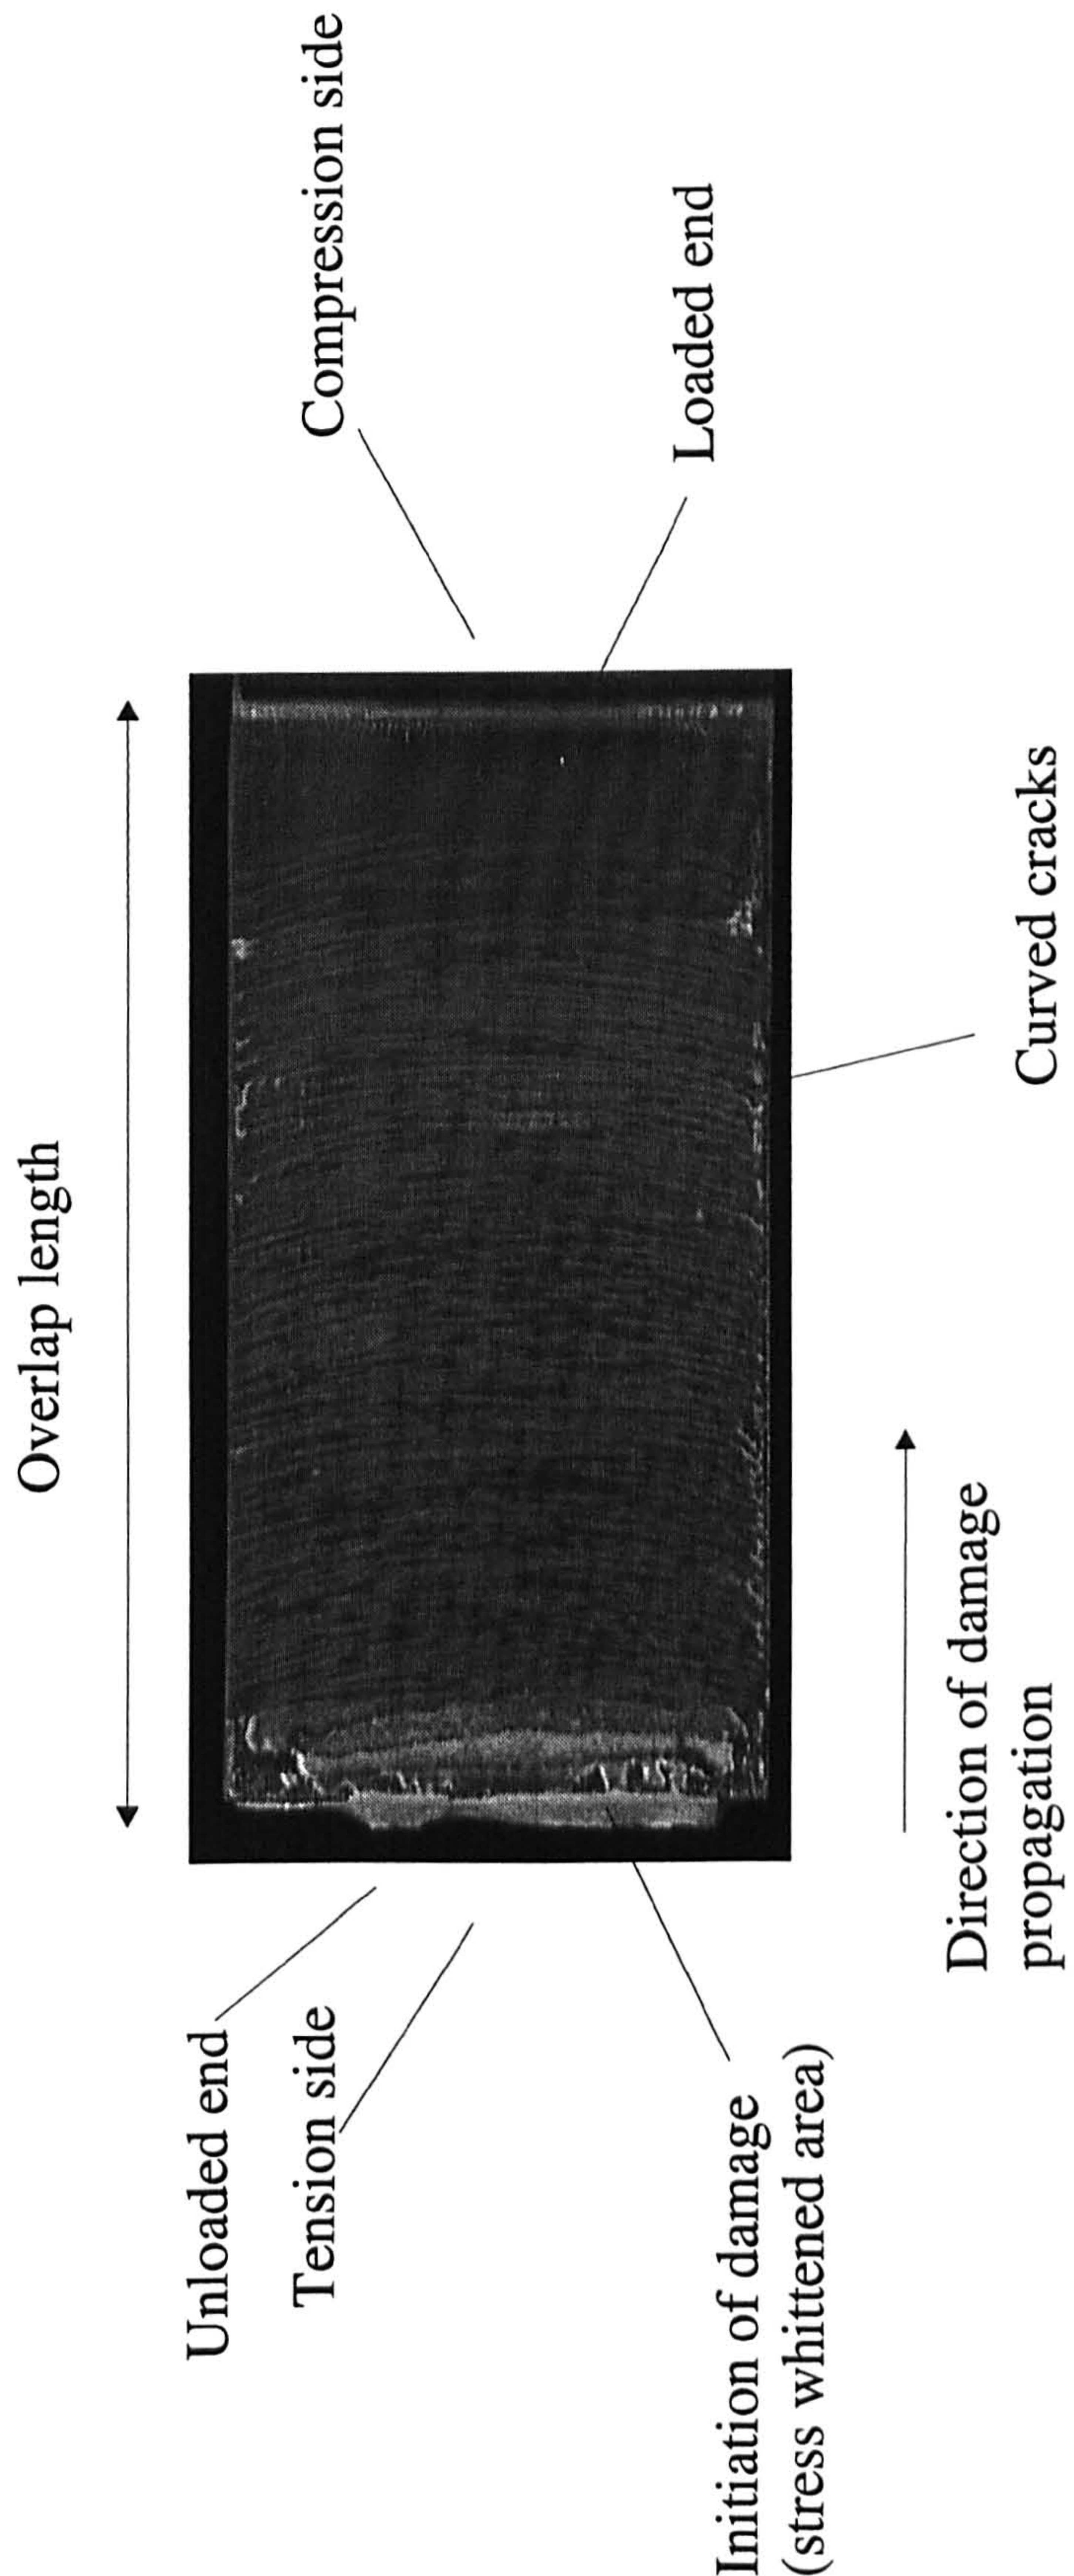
4 point bend test - 60 mm overlap - AV 119 adhesive - hard steel - failure pattern revealing curved cracks in the propagation of damage.
